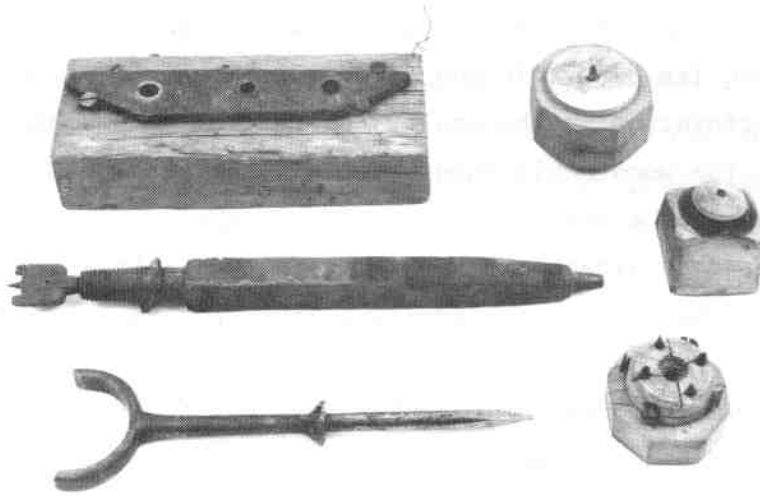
Remnants of a Wood Lathe, including one Chuck possibly from a Metal-working Lathe
